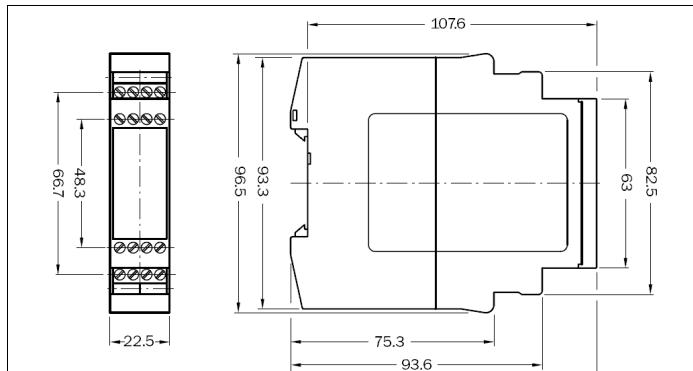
Dimensional drawing UE43-2MF with screw type terminals (mm)
